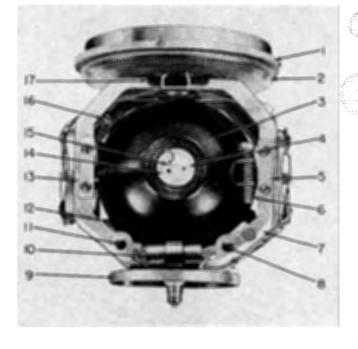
P. Gyro and Gimbal Assembly, Red Reference Side (E101)
